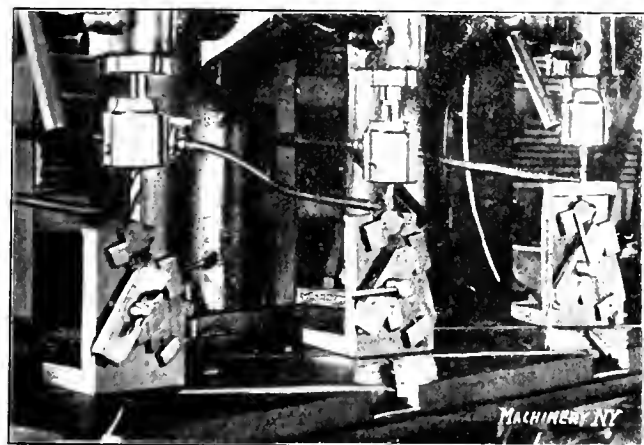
Drilling the Cutter Holes in the Straight Lathe Tool-holder
